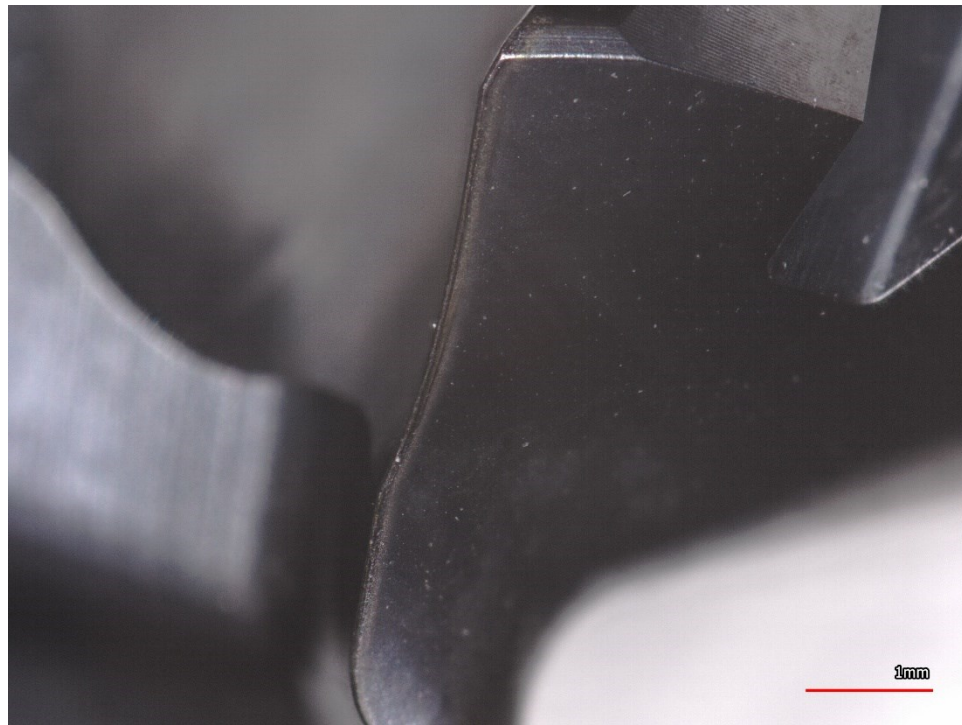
Drill insert flank after 56 holes in ADI. Less wear is present on the flank than on the rake face.
